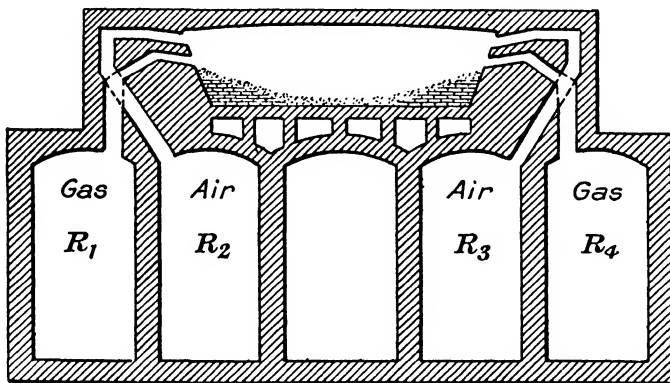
Open-hearth Steel Furnace (Longitudinal Section).
